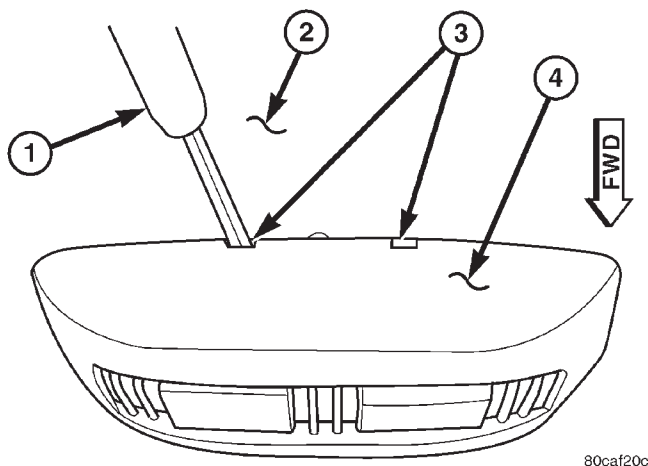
INTRUSION TRANSCIEVER MODULE REMOVE
